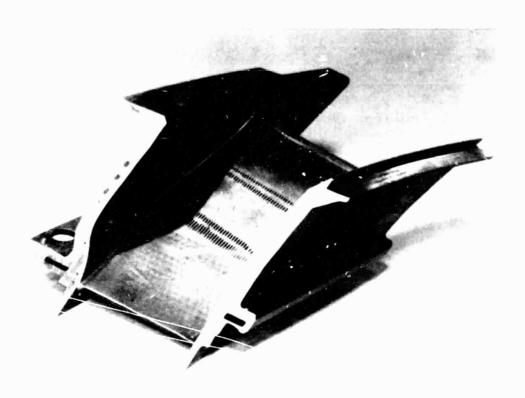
High-Pressure Turbine Component Rig Vanes With Machined Inner and Outer Platforms and Airfoil Cooling Holes Installed
